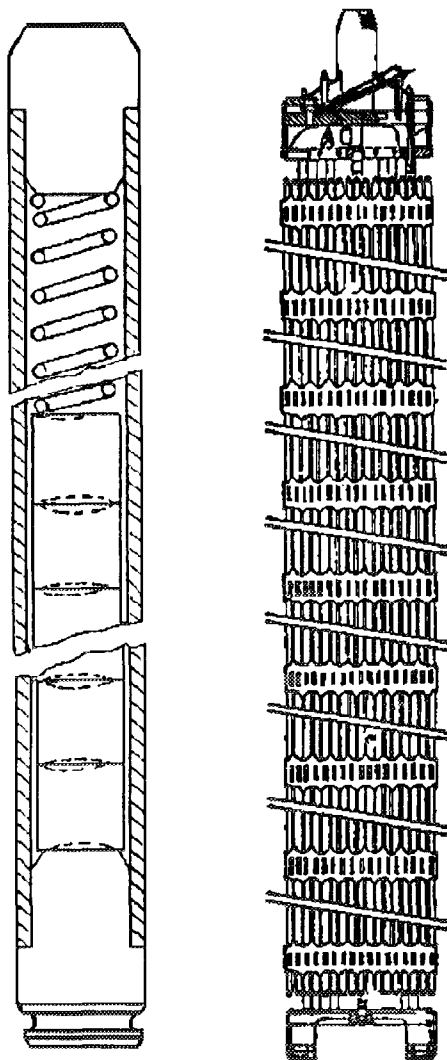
General design of PWR fuel rod and assembly (17×17 type)
